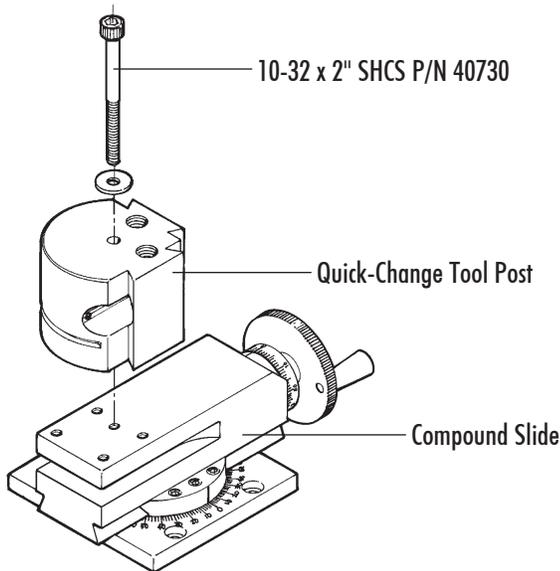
Shows the mounting of a tool post to the top of the compound slide.
